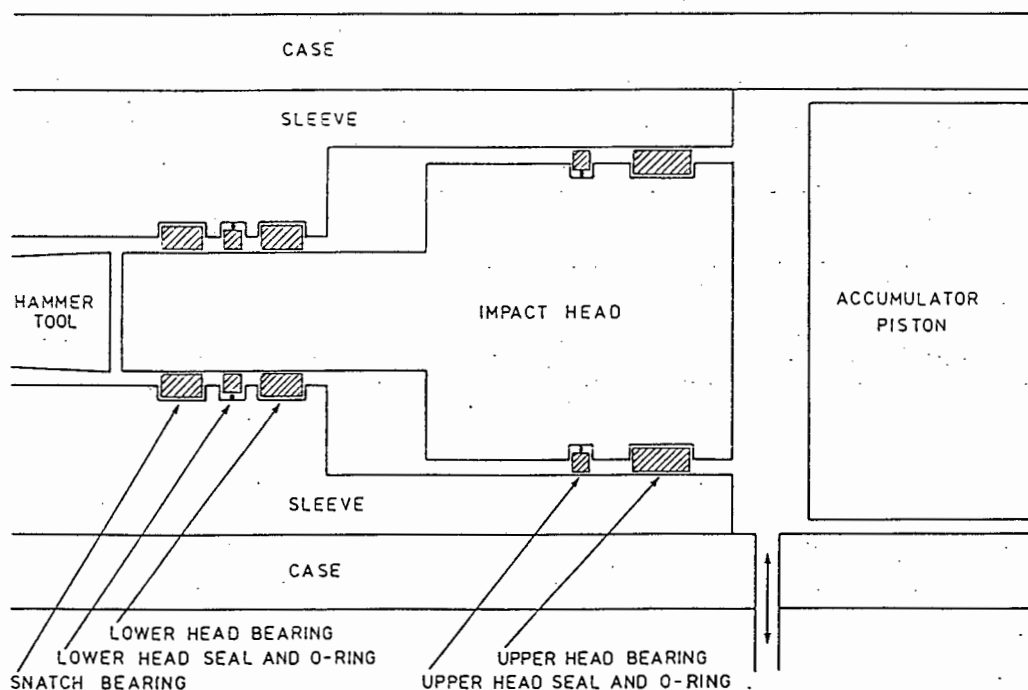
A schematic representation of the seal and bearing arrangement of the impact head
